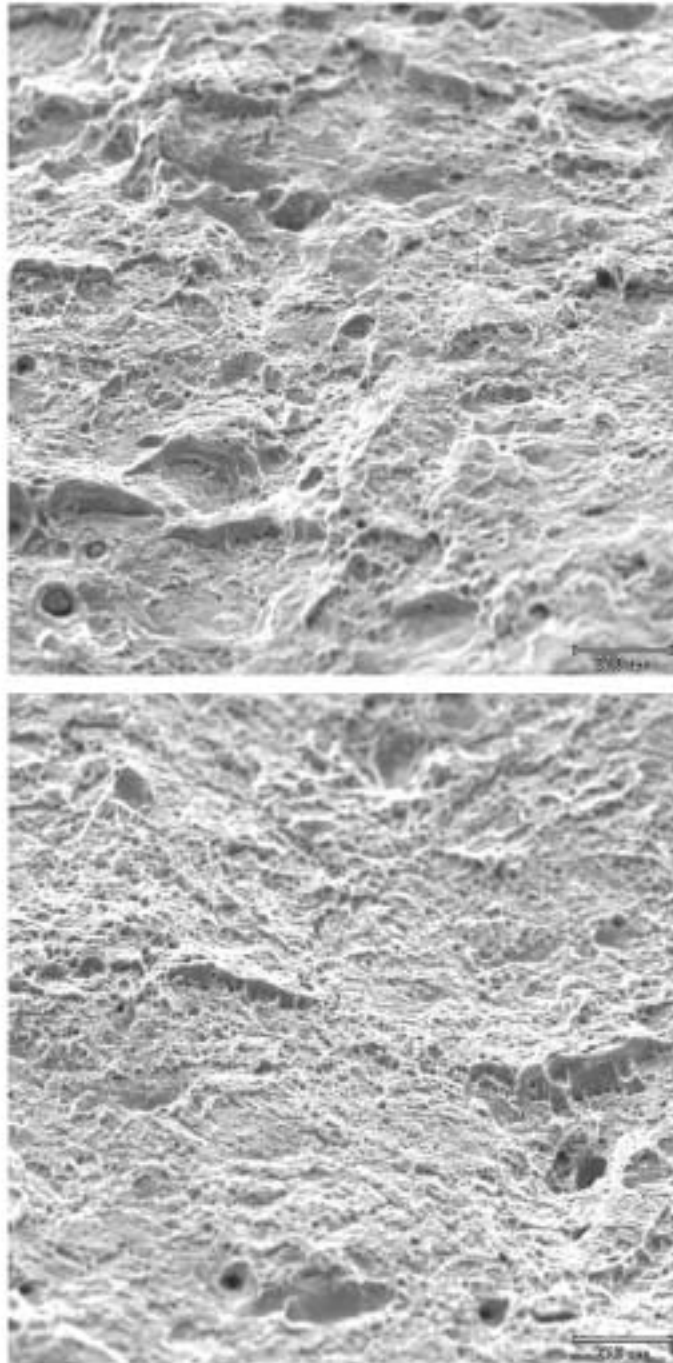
Areas of Fracture Surface of S1T4 Showing Ductile Dimples Mixed with Facets
